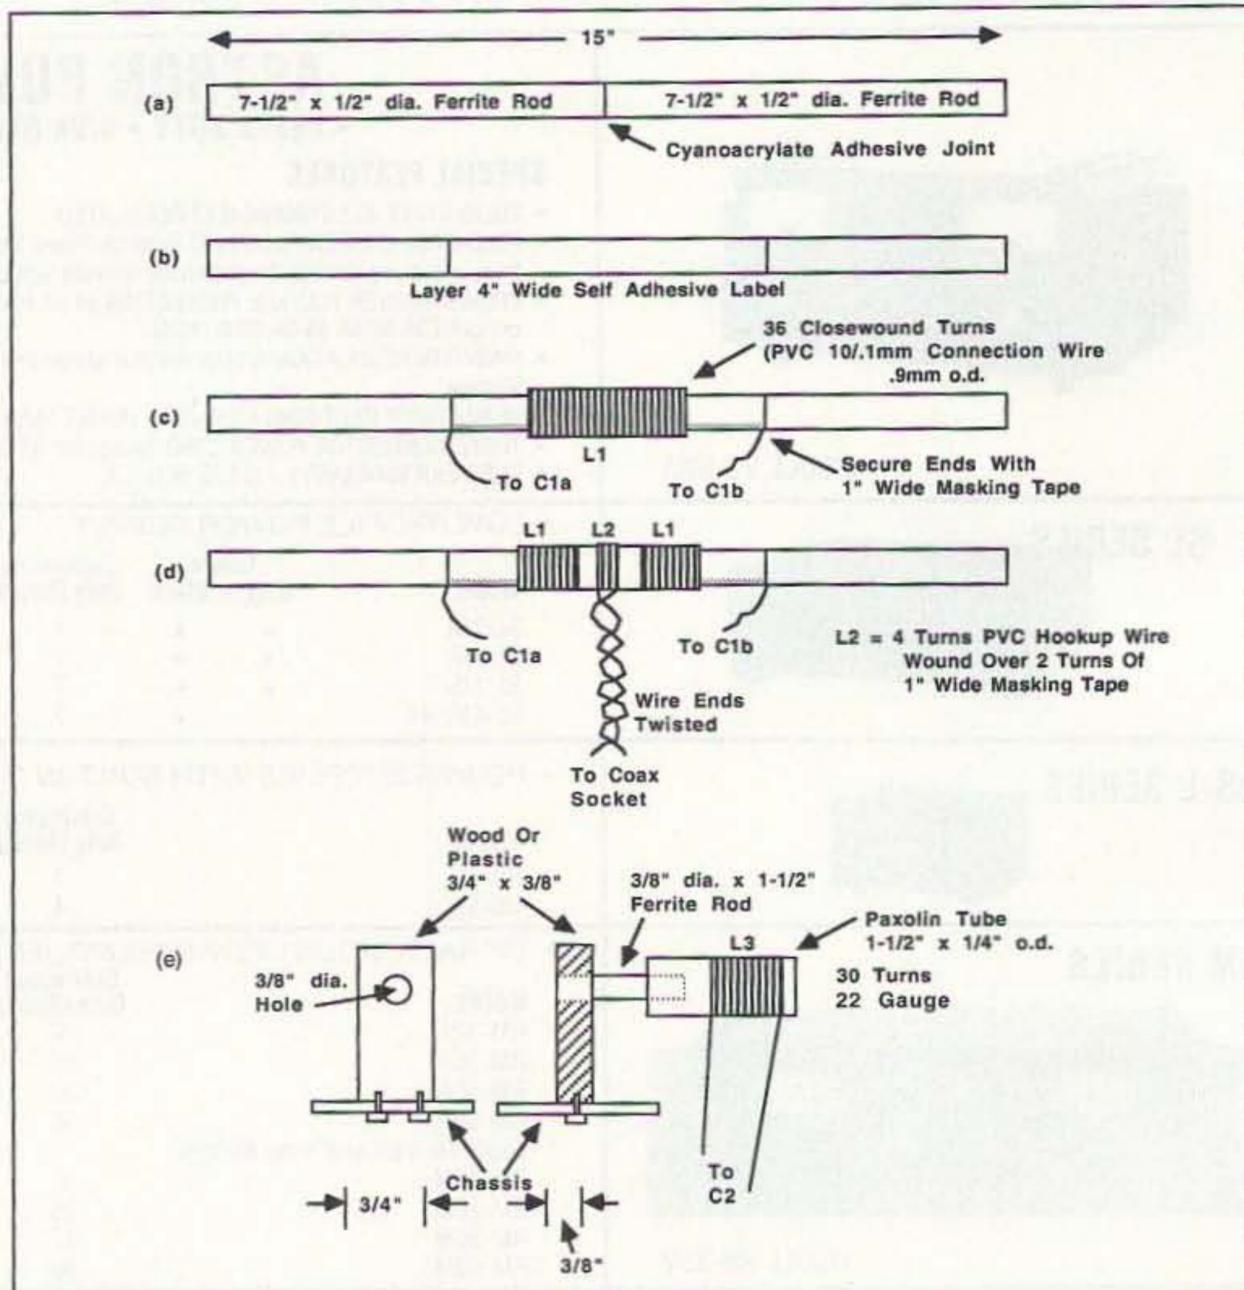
A, B, C, D: Ferrite L1 and L2 assembly; E: coil assembly.
